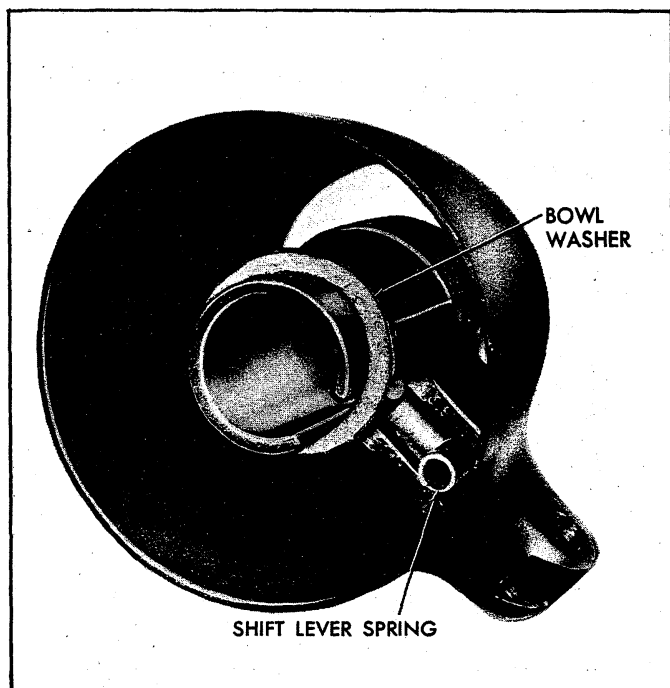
Upper Shift Lever Spring and Bowl Washer
